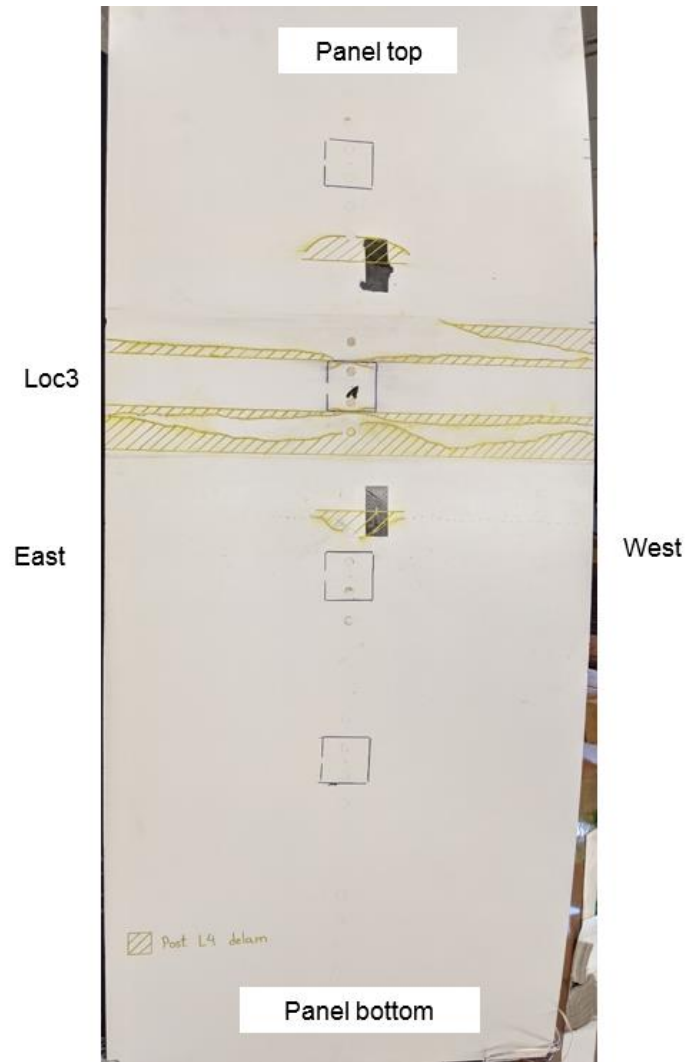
Skin strain gauges for Loc3 specimens.
